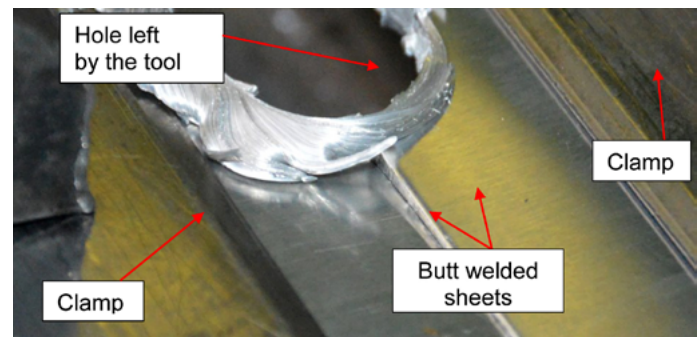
Deformation of sheets after the welding process performed with the bobbin tool [4]
